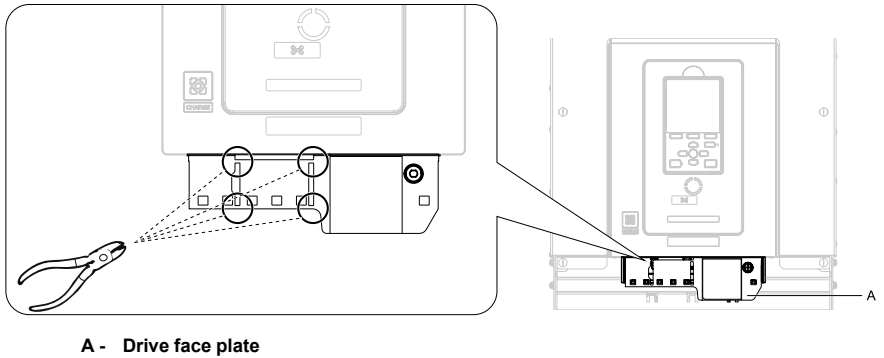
Cut the Drive Face Plate on FP605 Models 2143 to 2396 and 4156 to 4720
